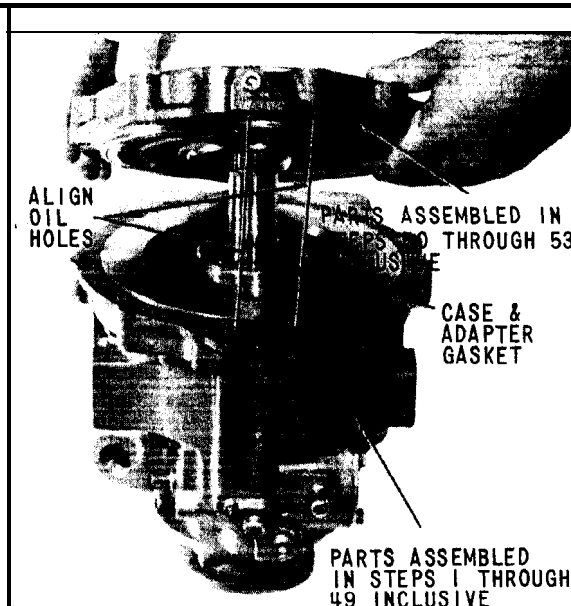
Assembling Adapter and Reverse Clutch Assembly onto Case
